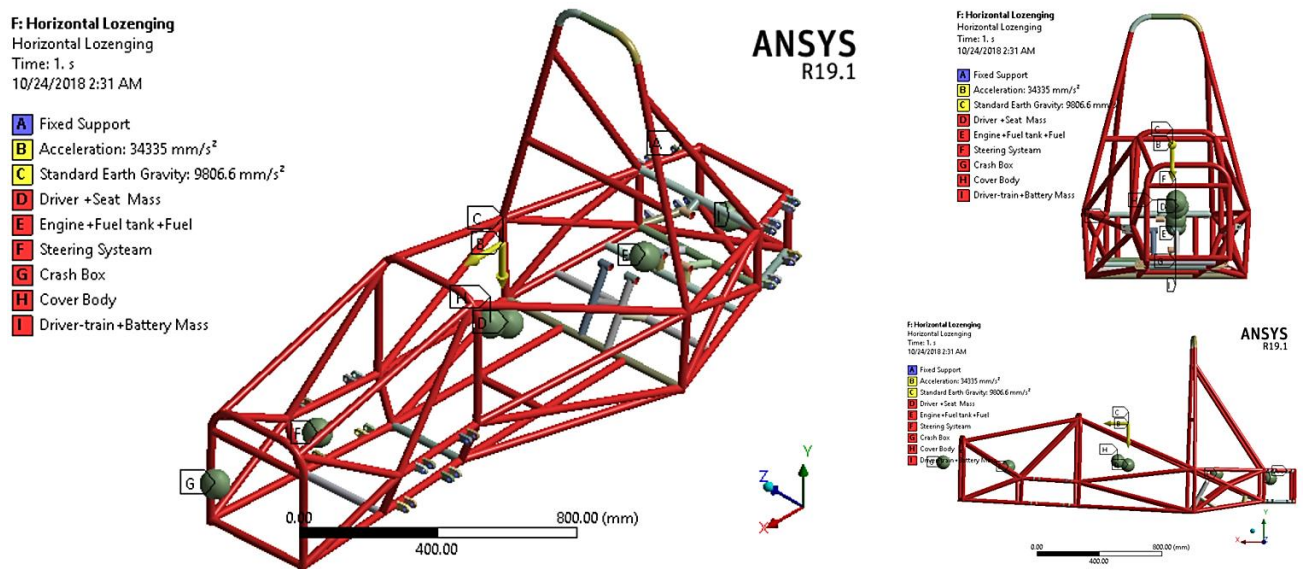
Horizontal lozenge load applied on the Formula SAE M2 Chassis (front, side, and isometric view)
